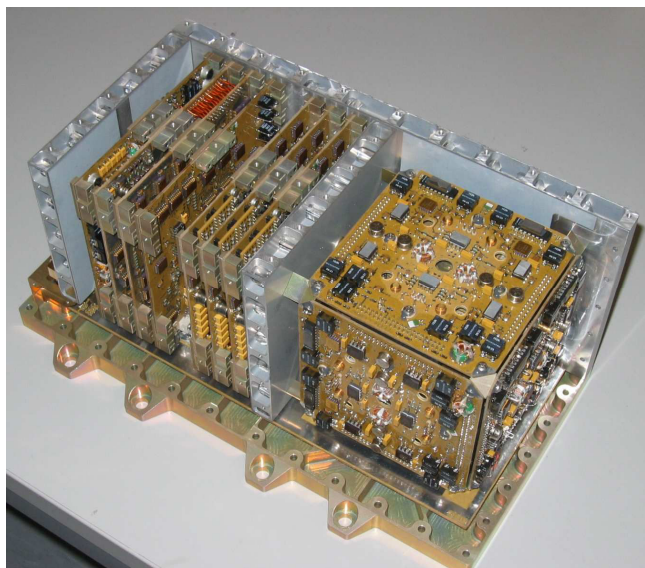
General view of the accelerometer design (two side plates and cover are dismounted)
